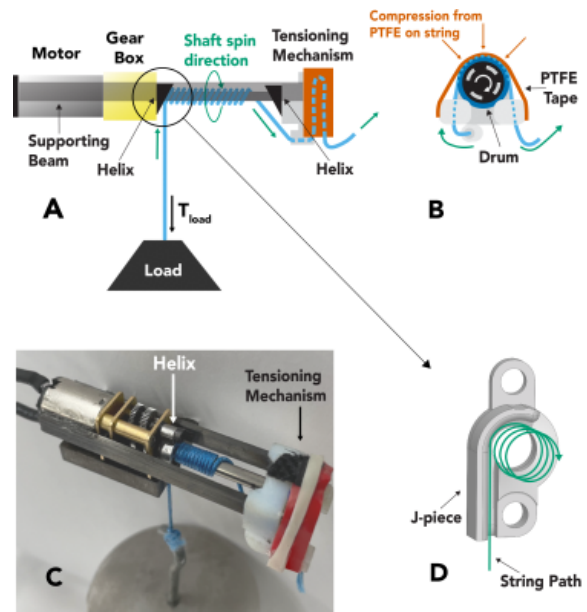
A) Side view illustration of the miniature capstan winch with core components labeled. B) End view showing the tensioning mechanism. C) Isometric photo of the winch. D) CAD rendering of the helix and "J" piece.
